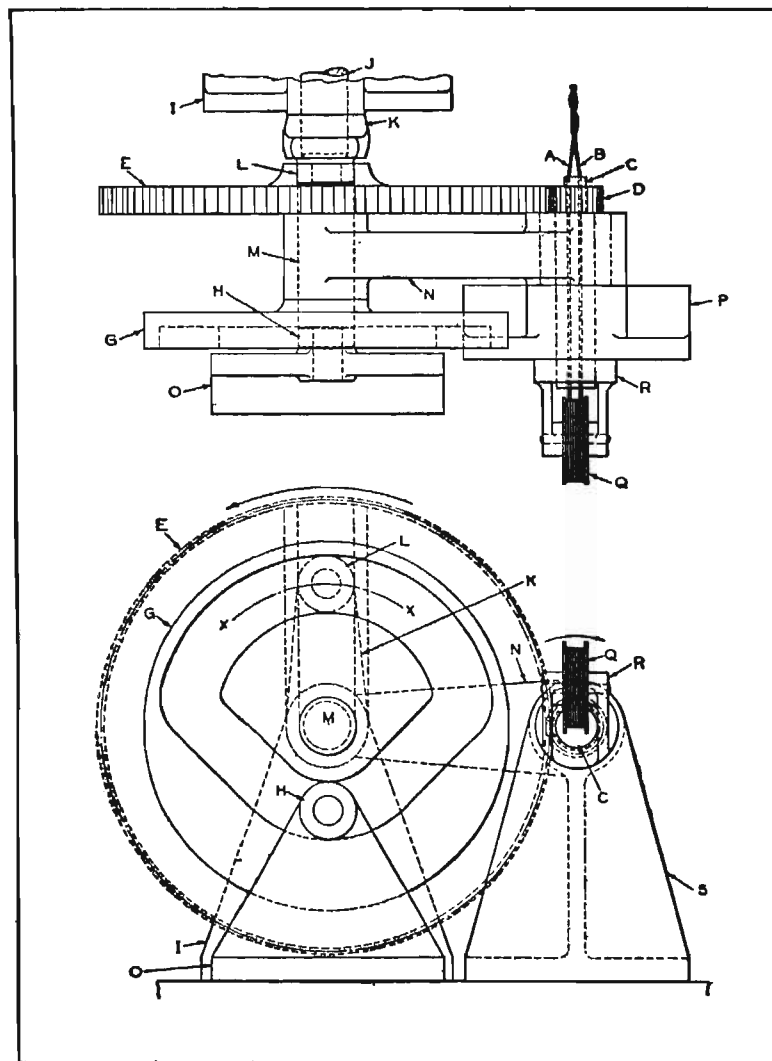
Mechanism of Wire Twisting Machine Designed to Vary Speed of Gear *E* and Spindle *C*.
